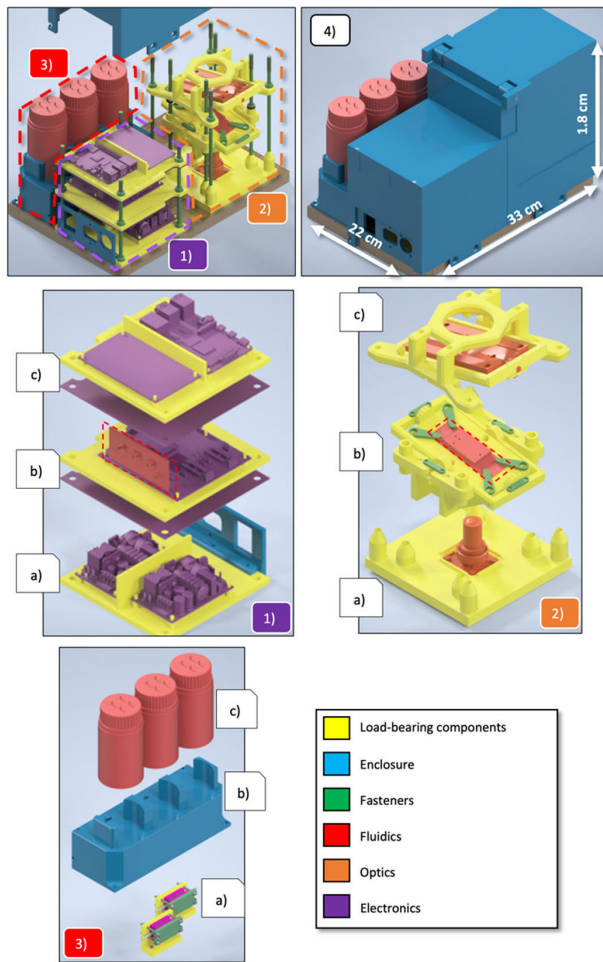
Prototype assembly, consisting of modules: (1) electronics module consisting of the power supply stage (a), the pump driver and pressure sensor stage (b) and the stage that contained the RPi4B as well as the ADC and filtering circuit for the optical sensor (c), plus the corresponding copper shielding plates. (2) The sensorics module, consisting of the base stage with the photodiode and lens (a), the microfluidic chip mount stage (b) and the light source mount stage (c). (3) fluidics module, which included L-mounts for the pumps (a) and a foam-padded enclosure (b), as well as (c) sample, reagent, and product collection containers. (4) The enclosure with 3D printed internal and external walls, as well as a wooden base plate to which all modules were mounted for stability. The M5 bolts mounting the stages of the modules are hidden in the close-up explosion views (1)-(3).
